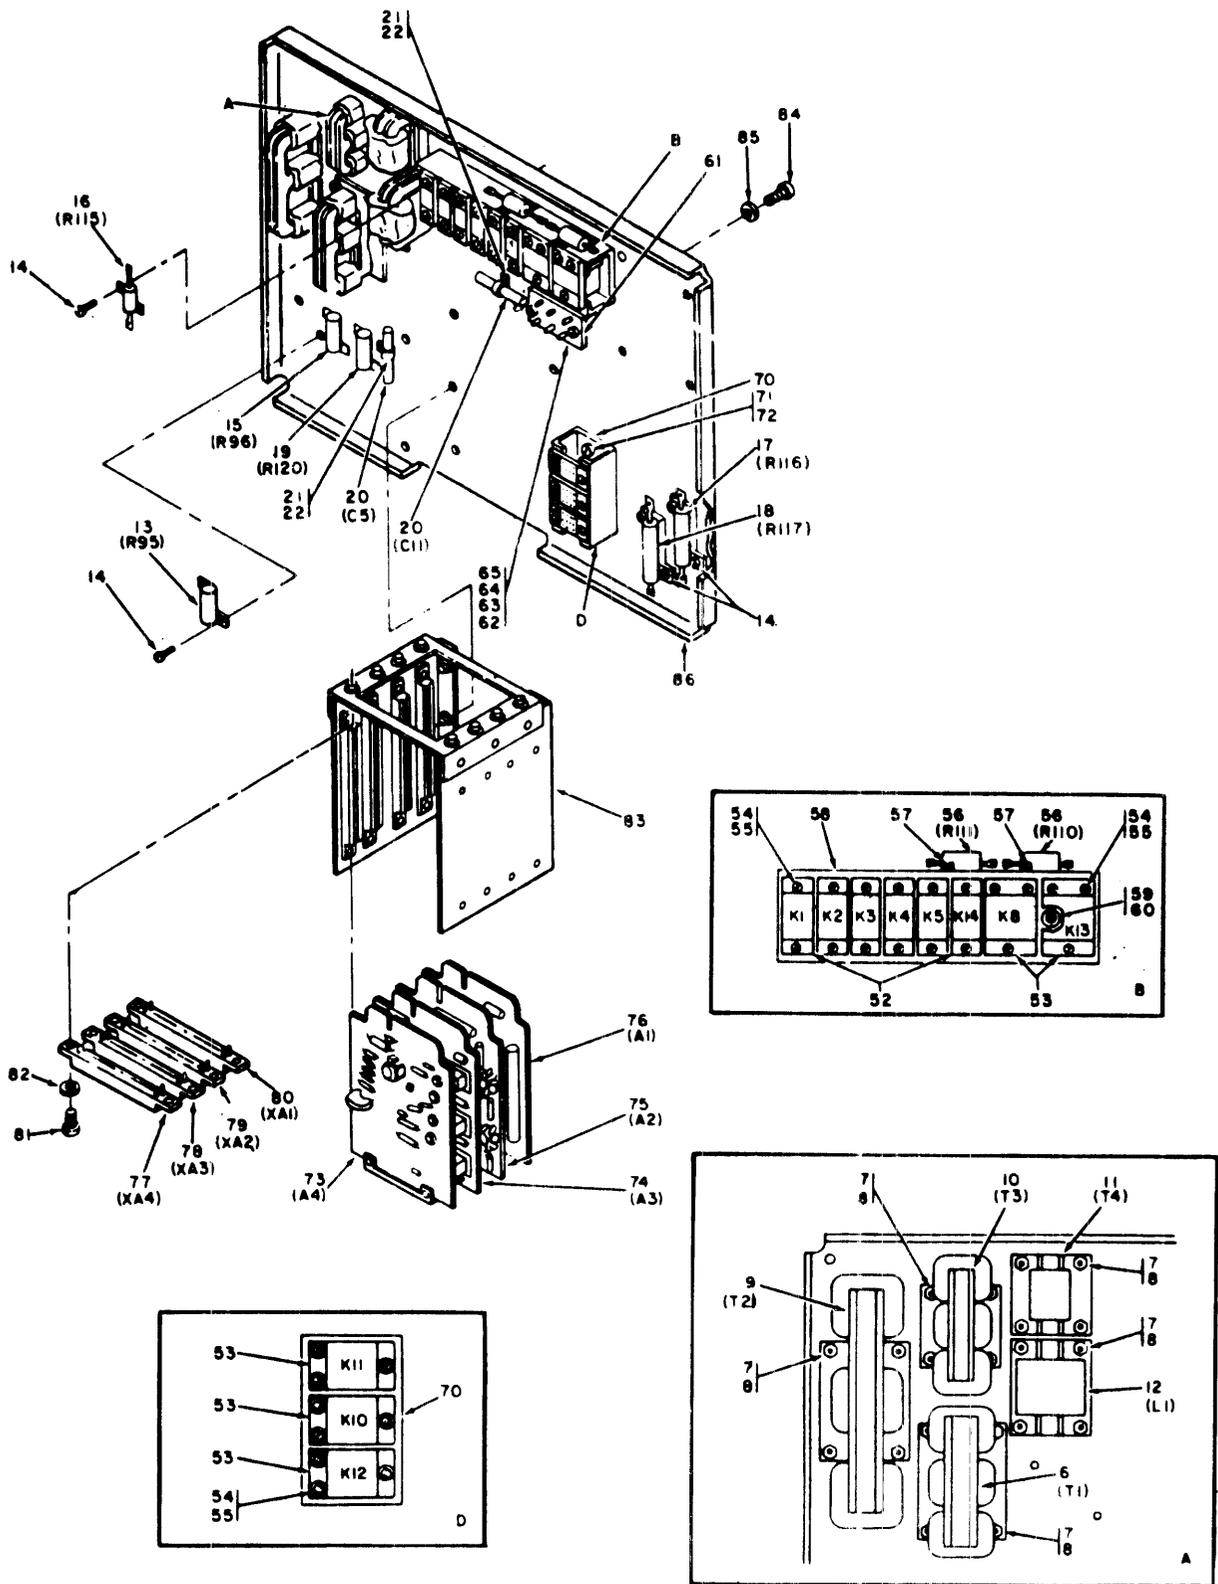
Electrical Components Assembly Exploded View (Sheet 2 of 2)
